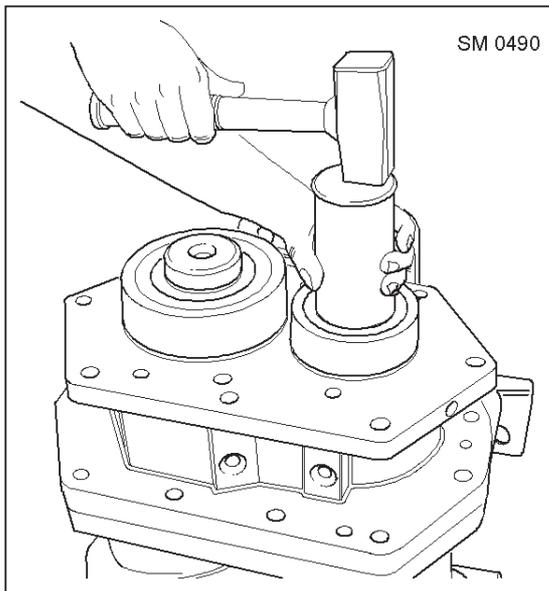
Fitting 2nd Inner RingHalf to Female Bearing
